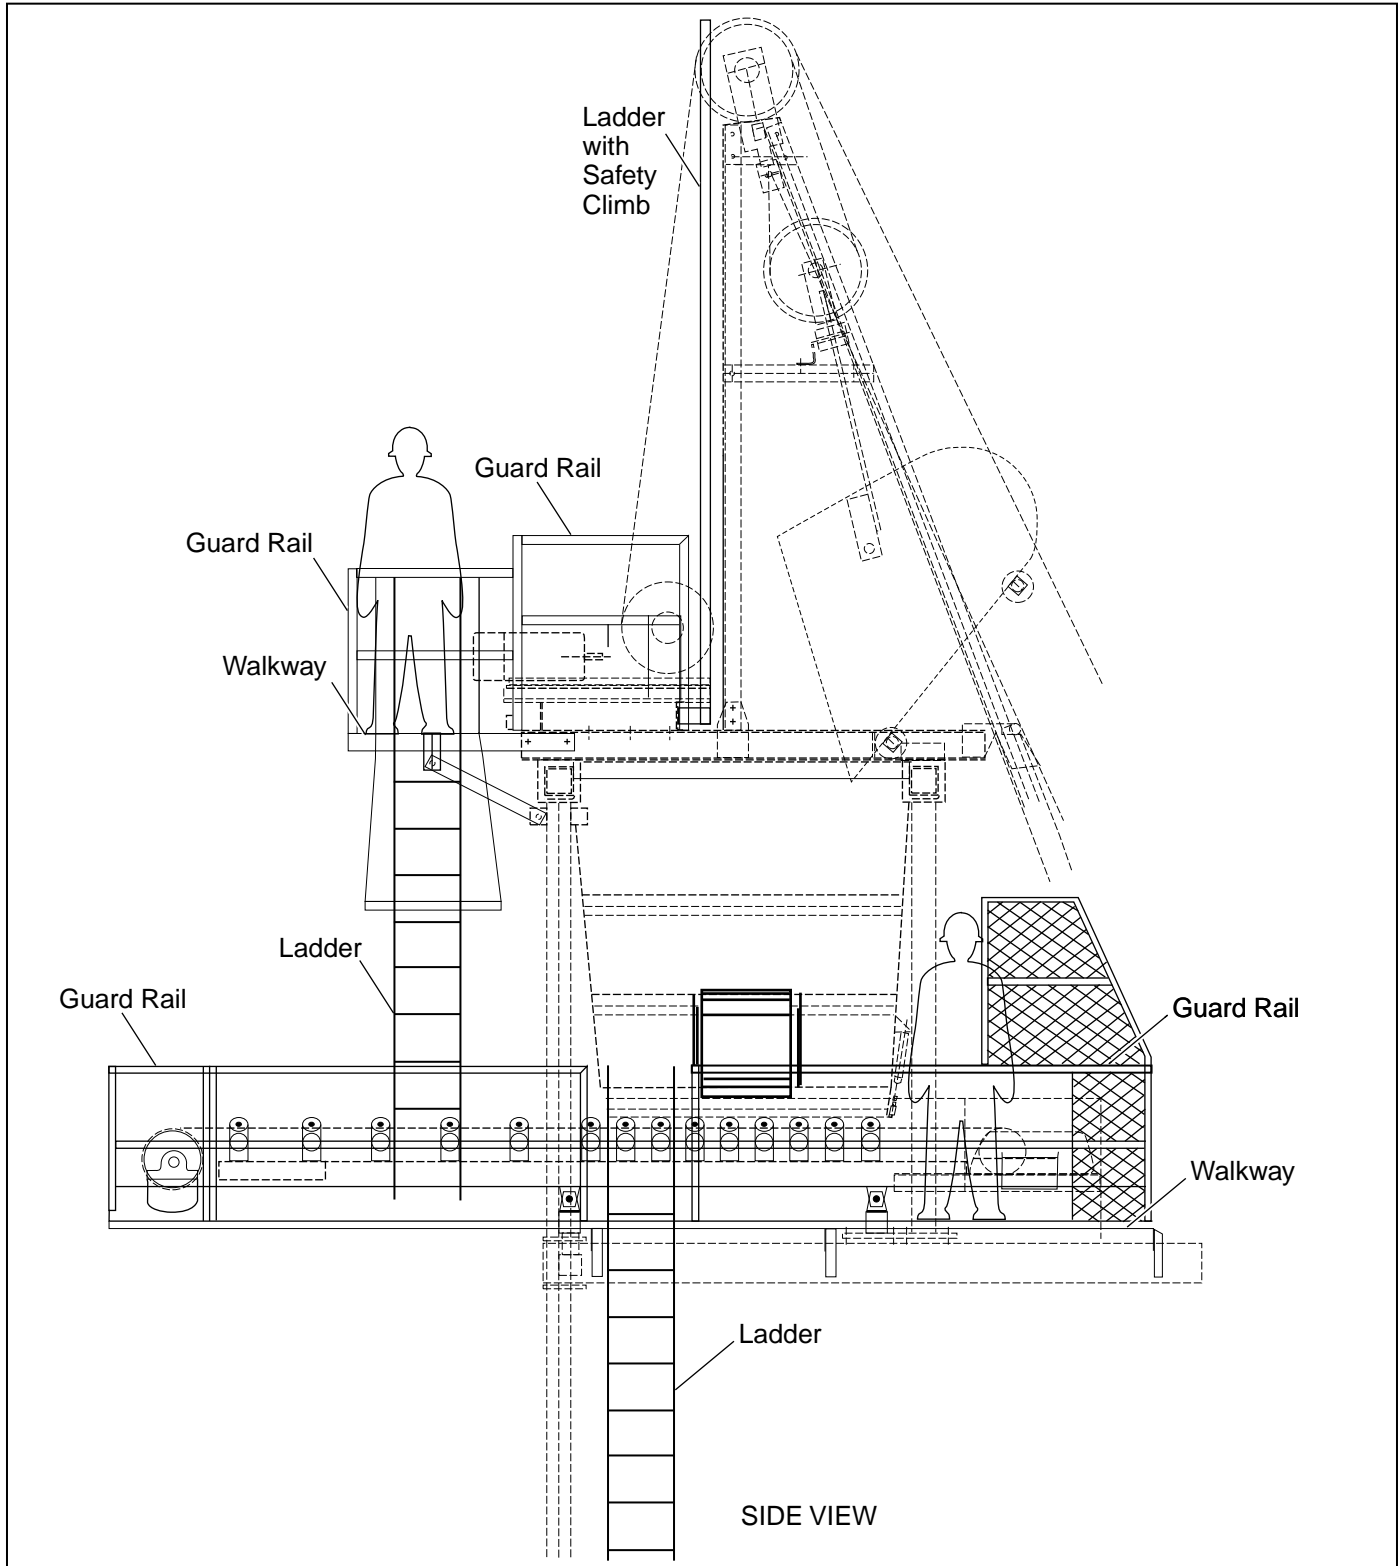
Ladders, Guard Rails and Walkways – Side View
